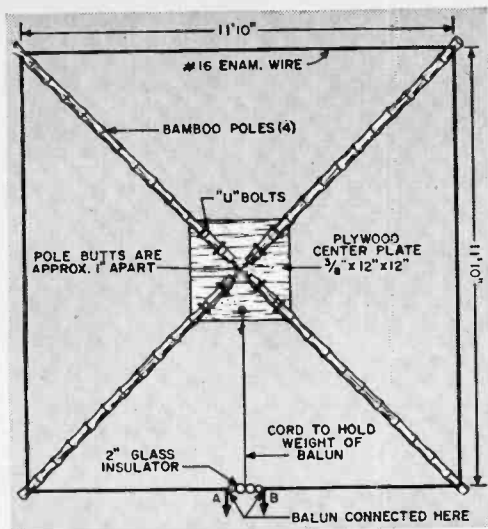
Antenna assembly is held together by U-bolts attached to center plate.
